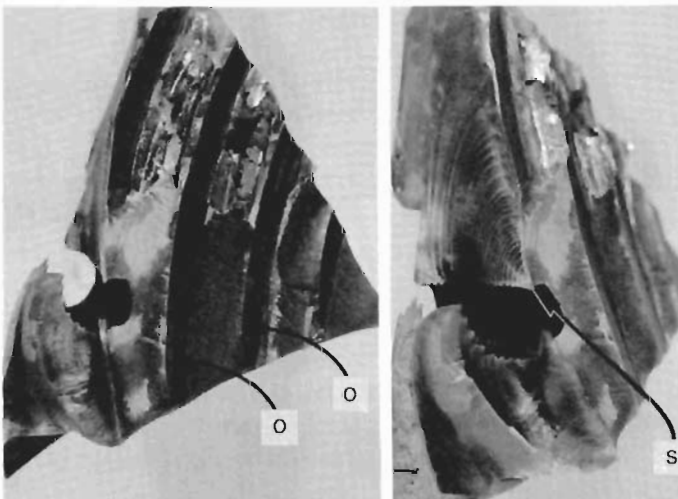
(b). Fracture "B" in the gear shown in Fig. 6-2(a). This fracture is an exact duplicate of fracture "A." See also Fig. 6-2(c).
